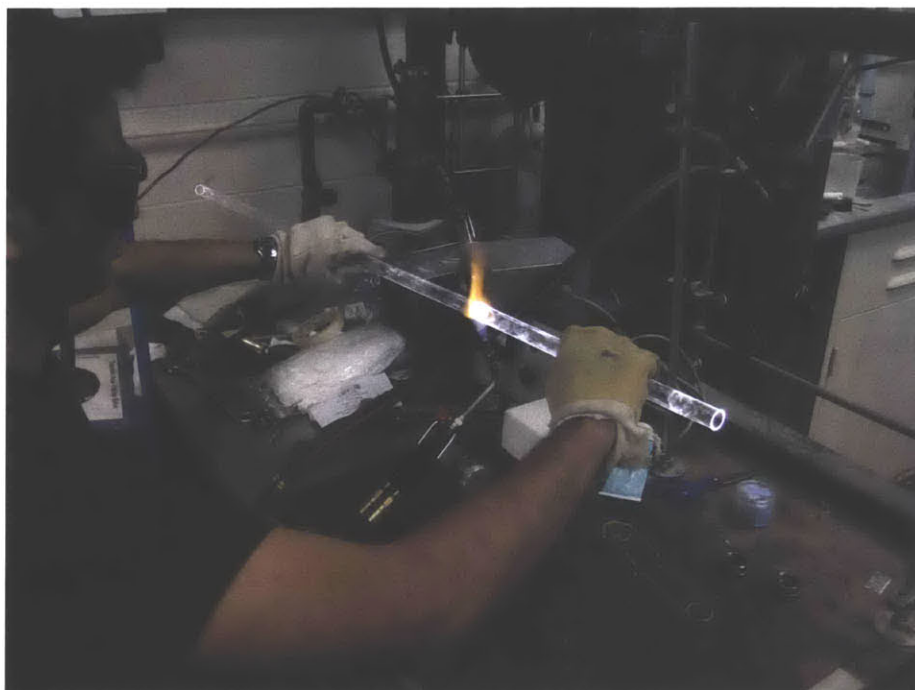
Heating the stock tube on the hydrogen flame, to produce a short piece of tube with one end sealed
